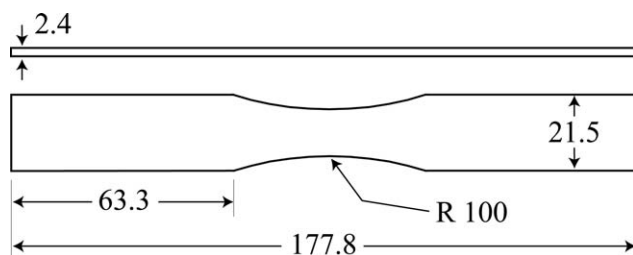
Geometry of the full-sized, tensile test specimens; all dimensions are in millimeters.
